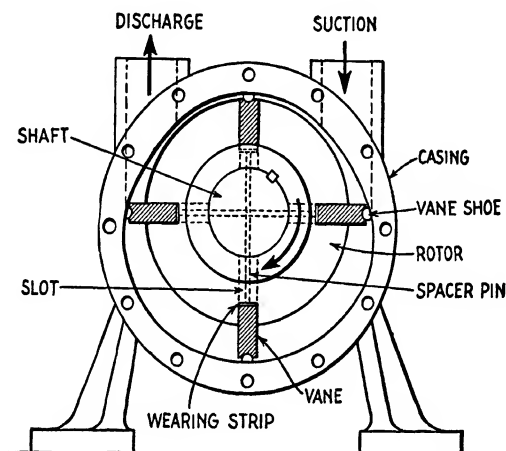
Rotary vane compressor. (Front cylinder head removed). The center of the rotor is offset in a cylinder having a cam-shaped internal bore. This shape is such that all lines passing through the shaft center from inside to inside surface of the cylinder are of the same length. Since the distance between sliding surfaces of any pair of opposite vanes is always the same, rigid spacing pins can be inserted between vanes whose contact with the cylinder walls does not then require springs or depend on centrifugal force. (Courtesy Foster Pump Works.)
